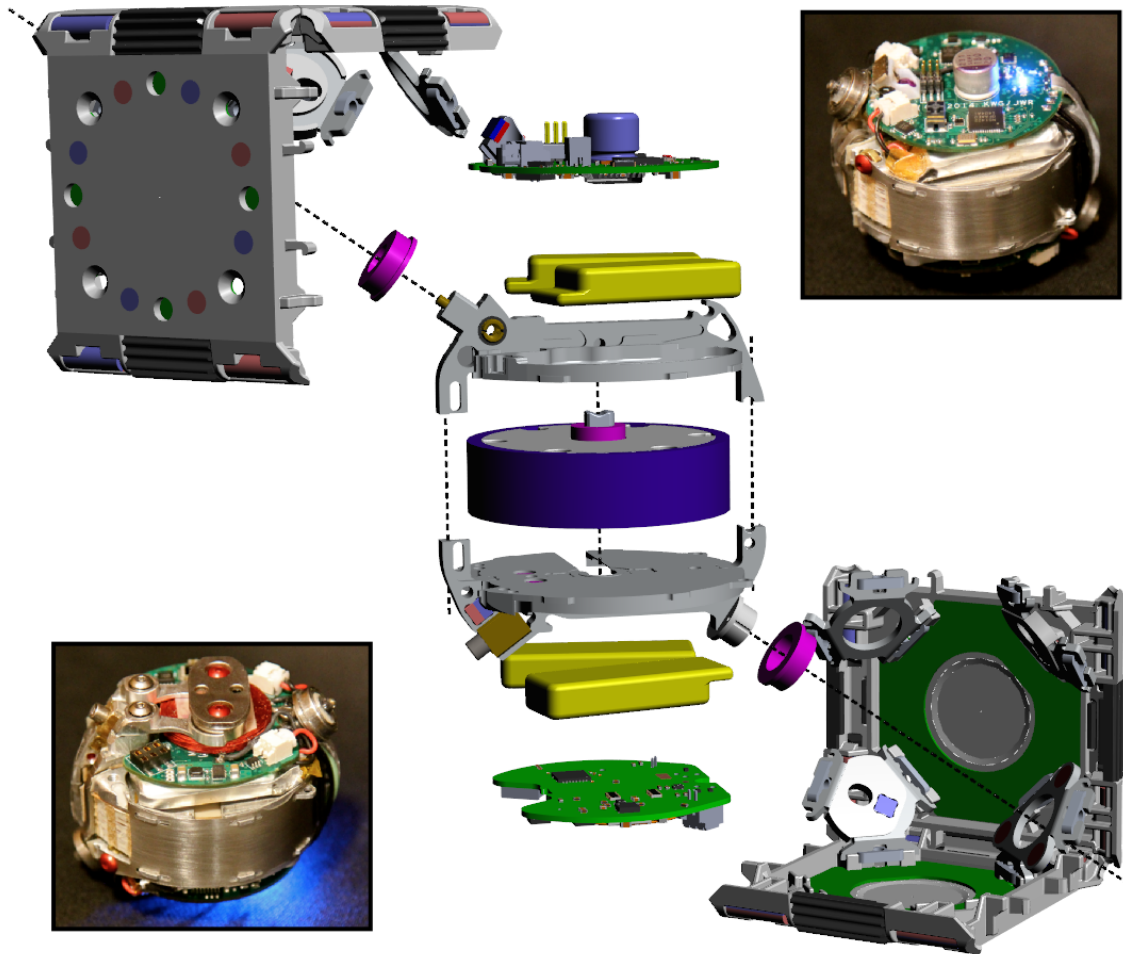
Each 3D M-Block is built around a six-piece injection molded frame *gray* which supports the central assembly *lighter gray*, *split in half* along the frame’s longest diagonal axis on two ball bearings *pink*. The molded frame holds eight magnets colored red and blue to represent their magnetic polarities. The central assembly holds batteries *yellow* and circuit boards *green* as well as the flywheel *purple*. The flywheel represents the inertial actuator. For clarity, the brake assembly is not shown in the exploded-view, it can be seen in the bottom-left inset picture. The top-right inset picture shows the main PCB.
